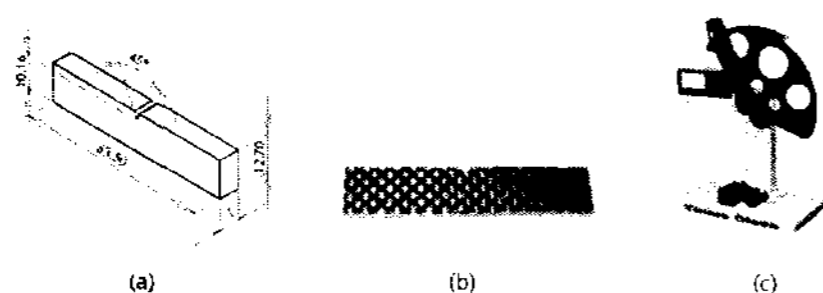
The dimension of izod impact test specimen (a), sample (b), and tester (c)
